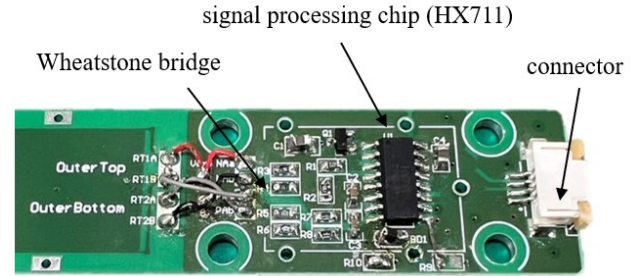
The PCB-based bending force sensor physical enlarged detail diagram.
